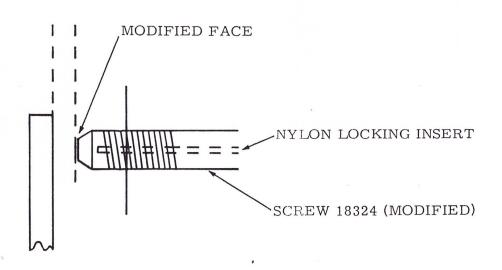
(c) MODIFIED FACE AND SCREW ADJUSTMENT
